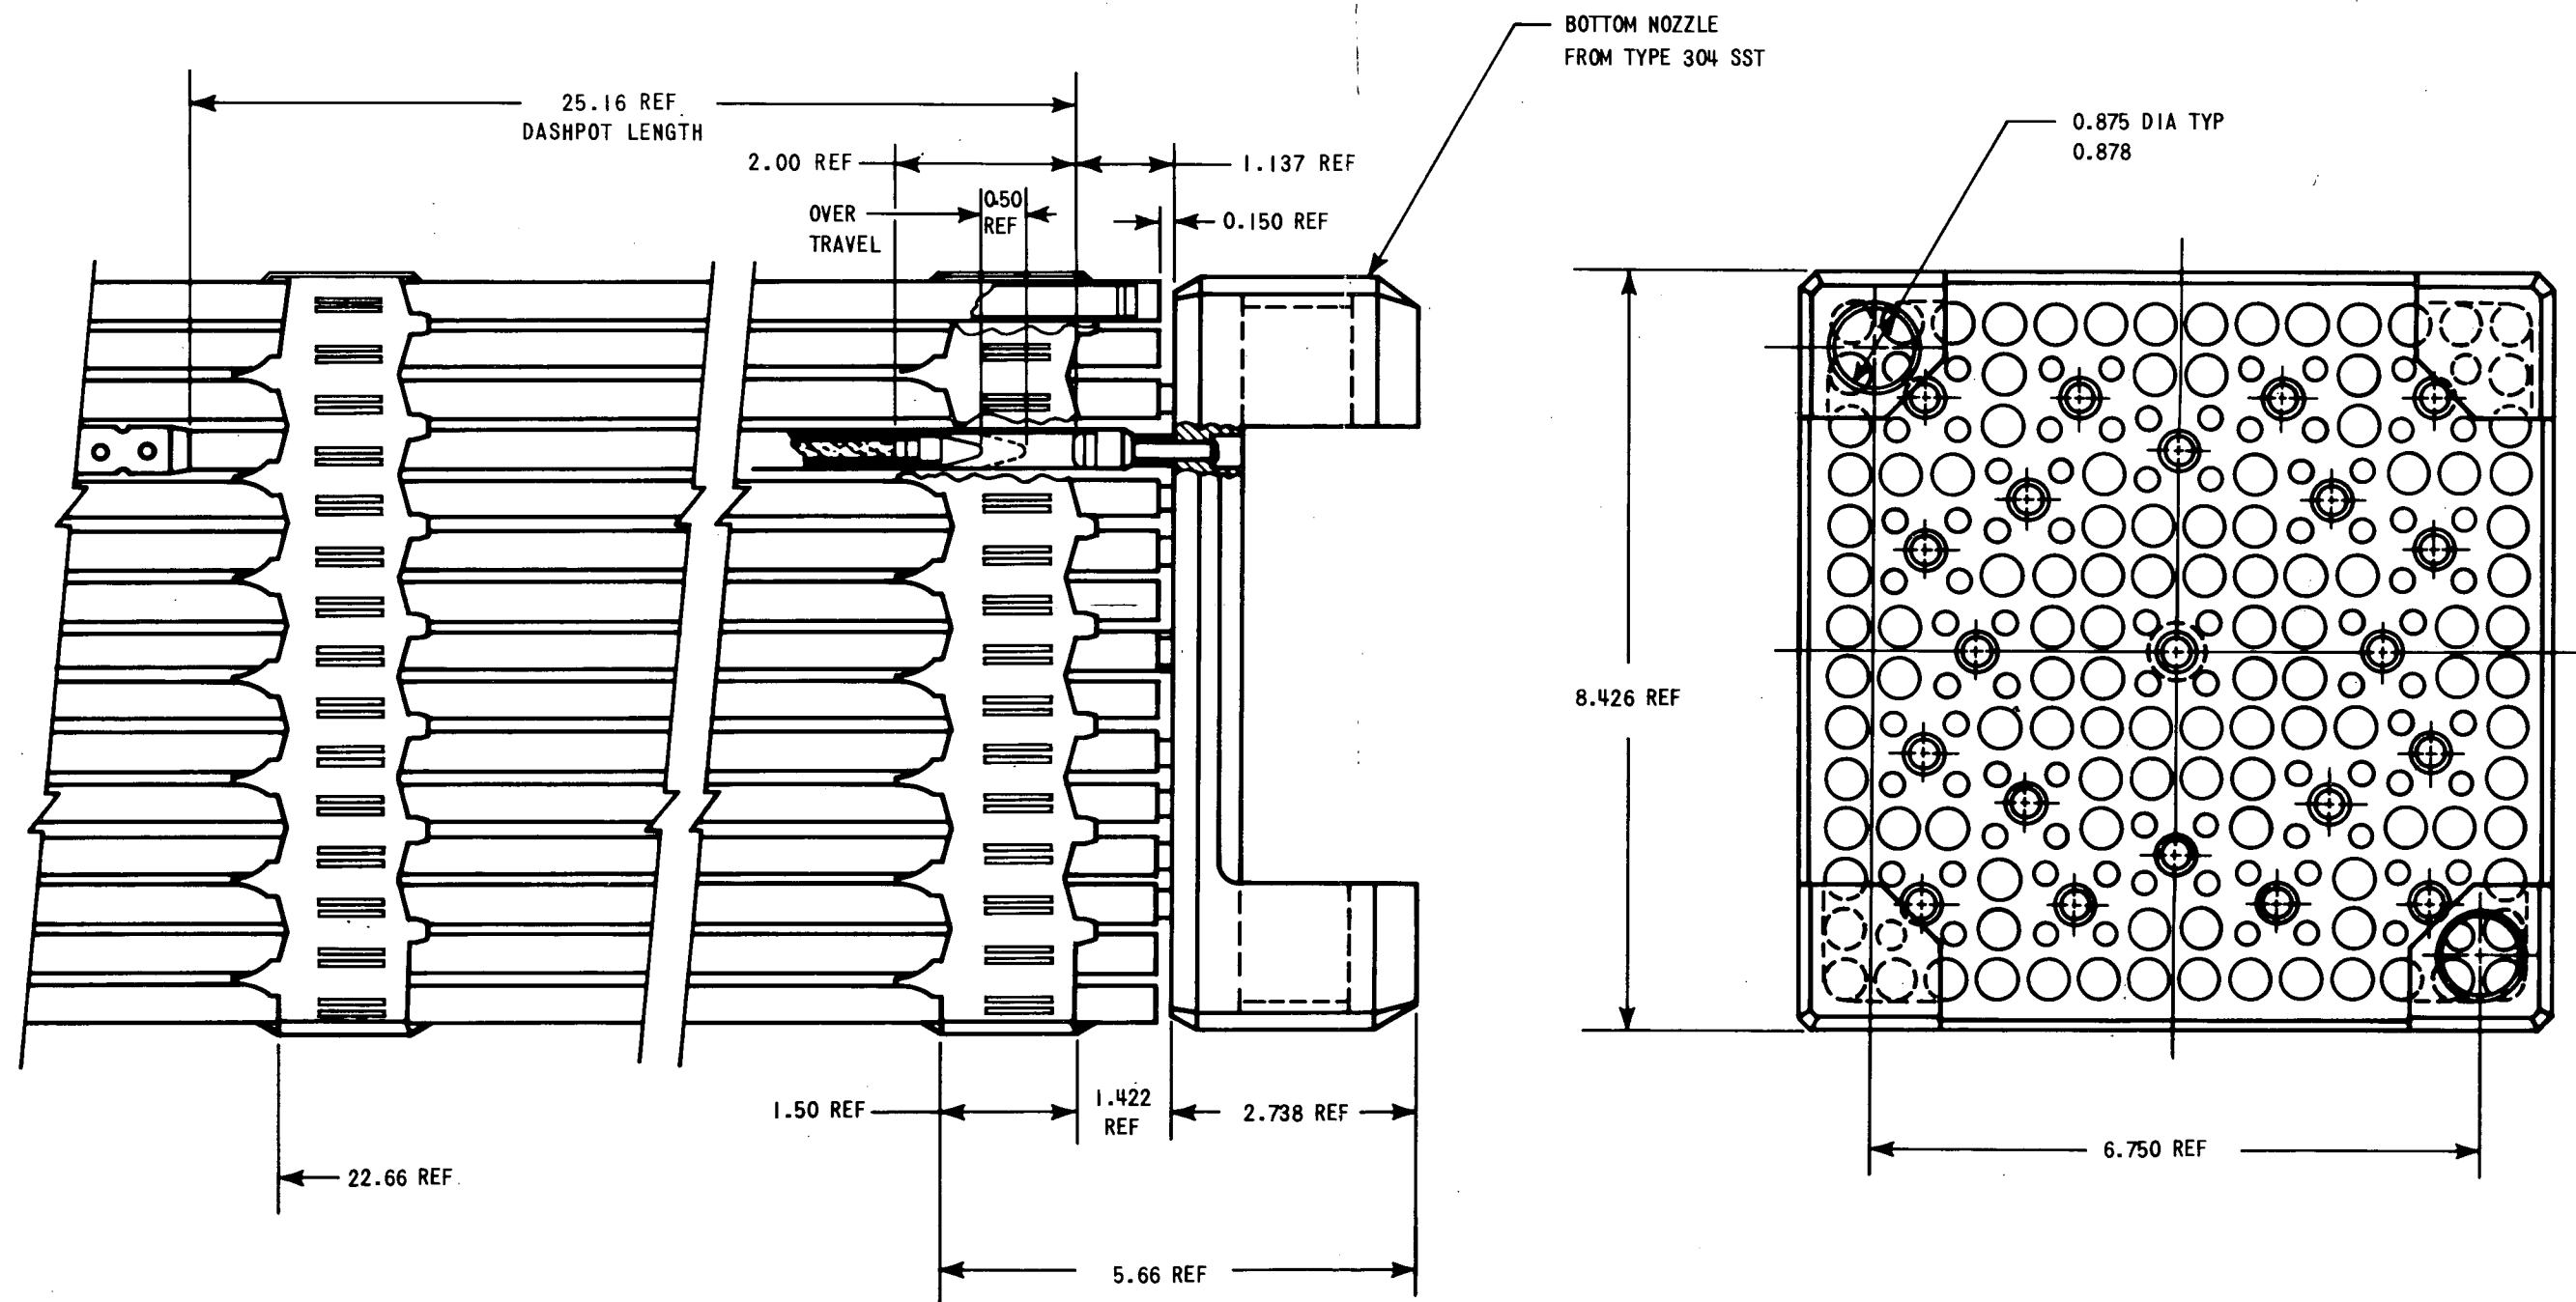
Bottom End of Fuel Assembly Showing Plate Type Bottom Nozzle
